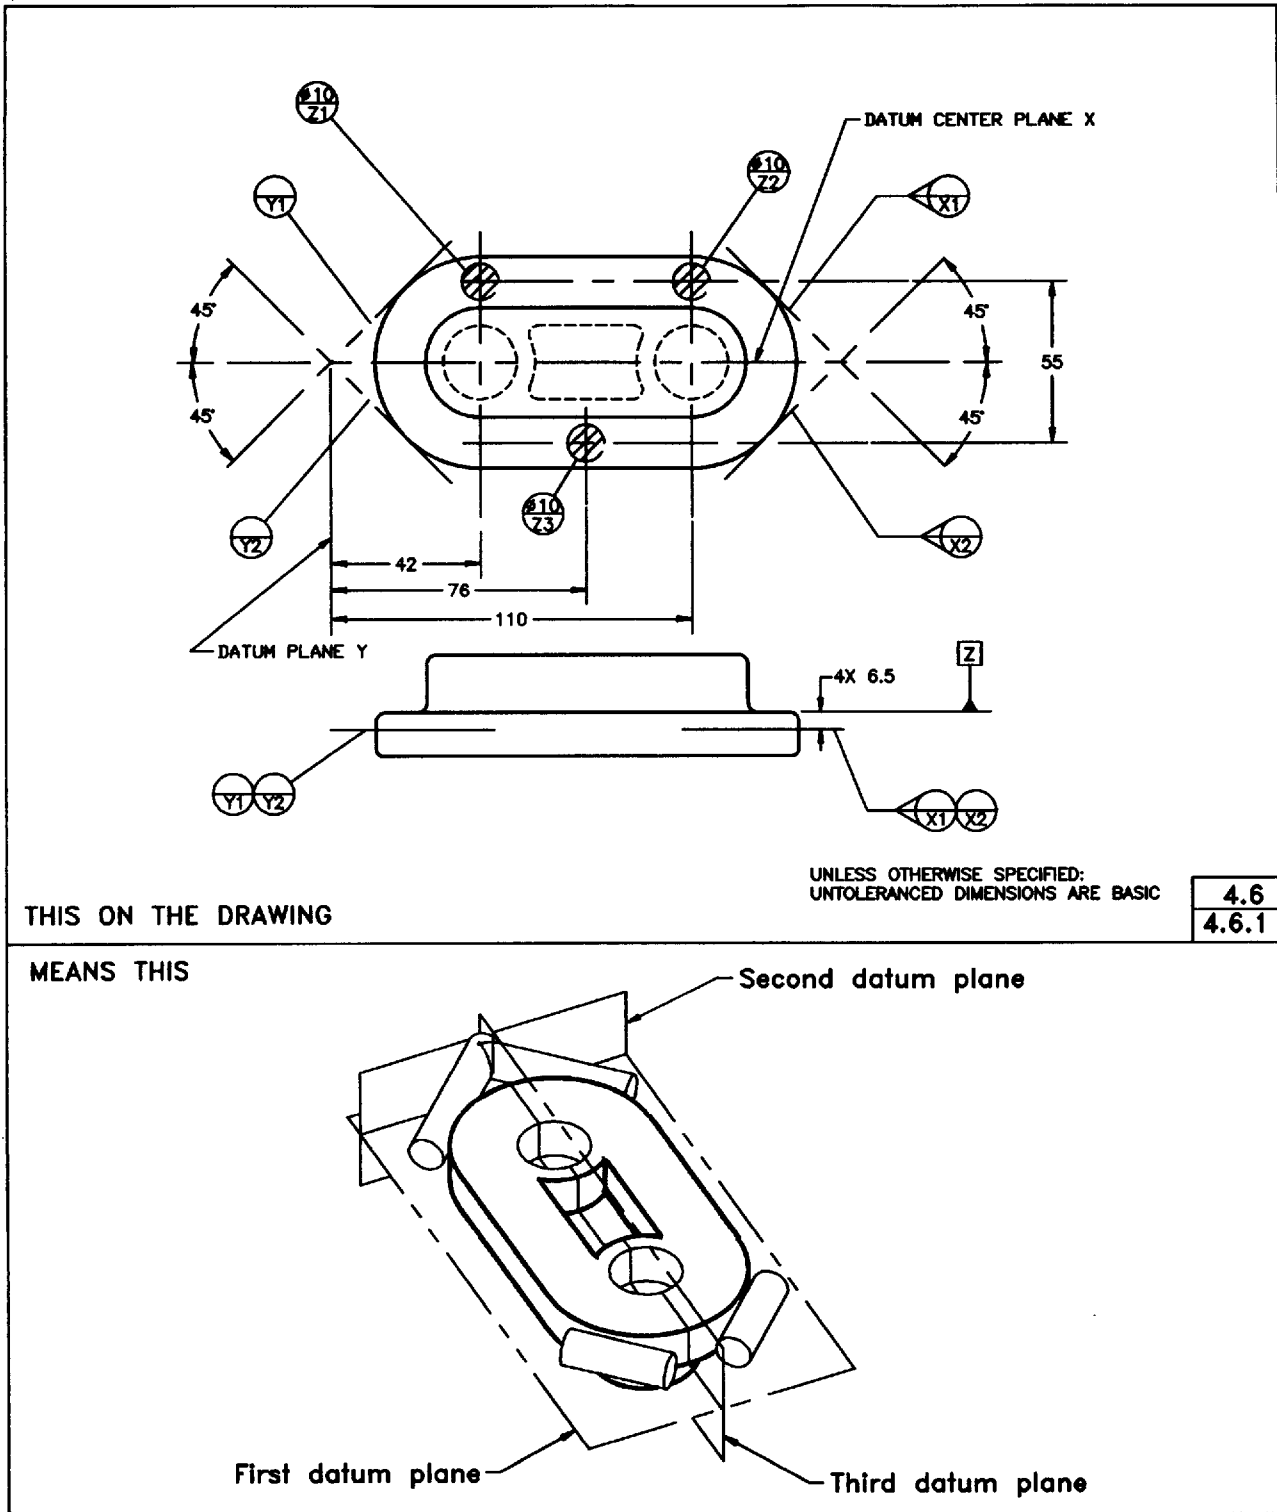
MOVABLE DATUM TARGETS ESTABLISHING A DATUM CENTER PLANE
